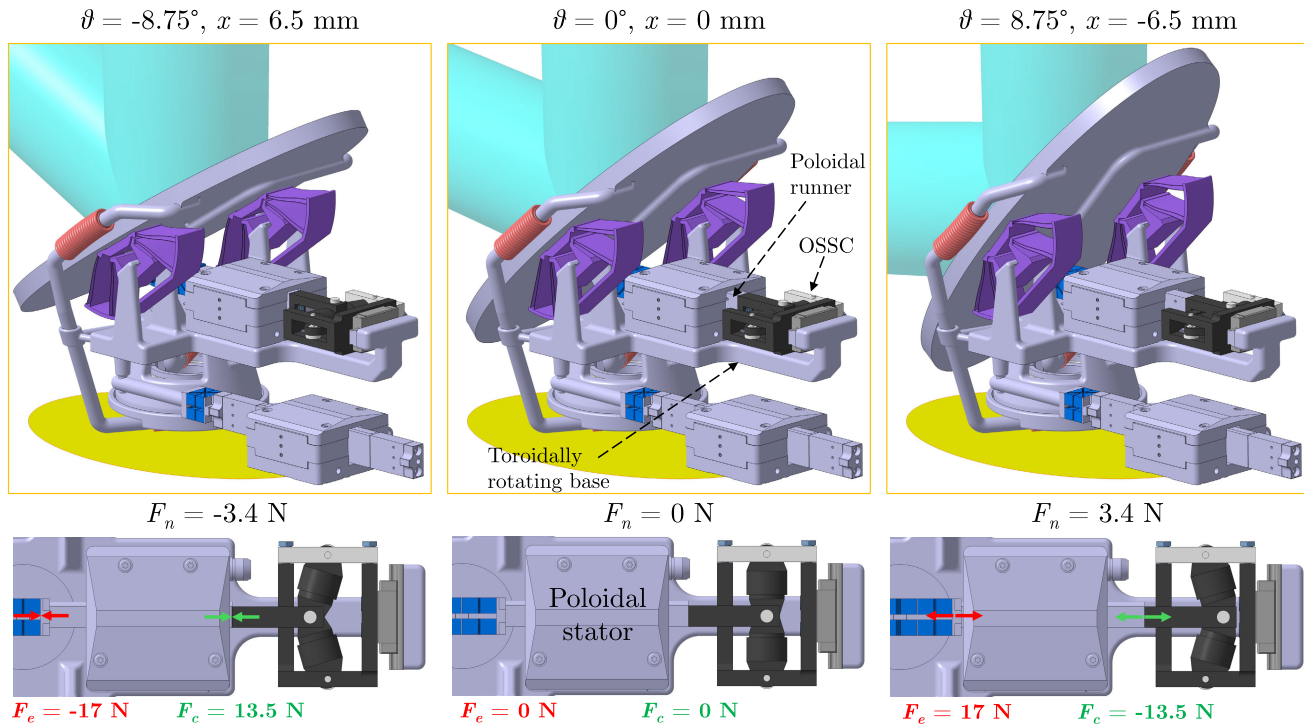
Integration of the OSSC in the launcher assembly. Left and right views show end-of-stroke positions, while nominal position is shown in the center.
